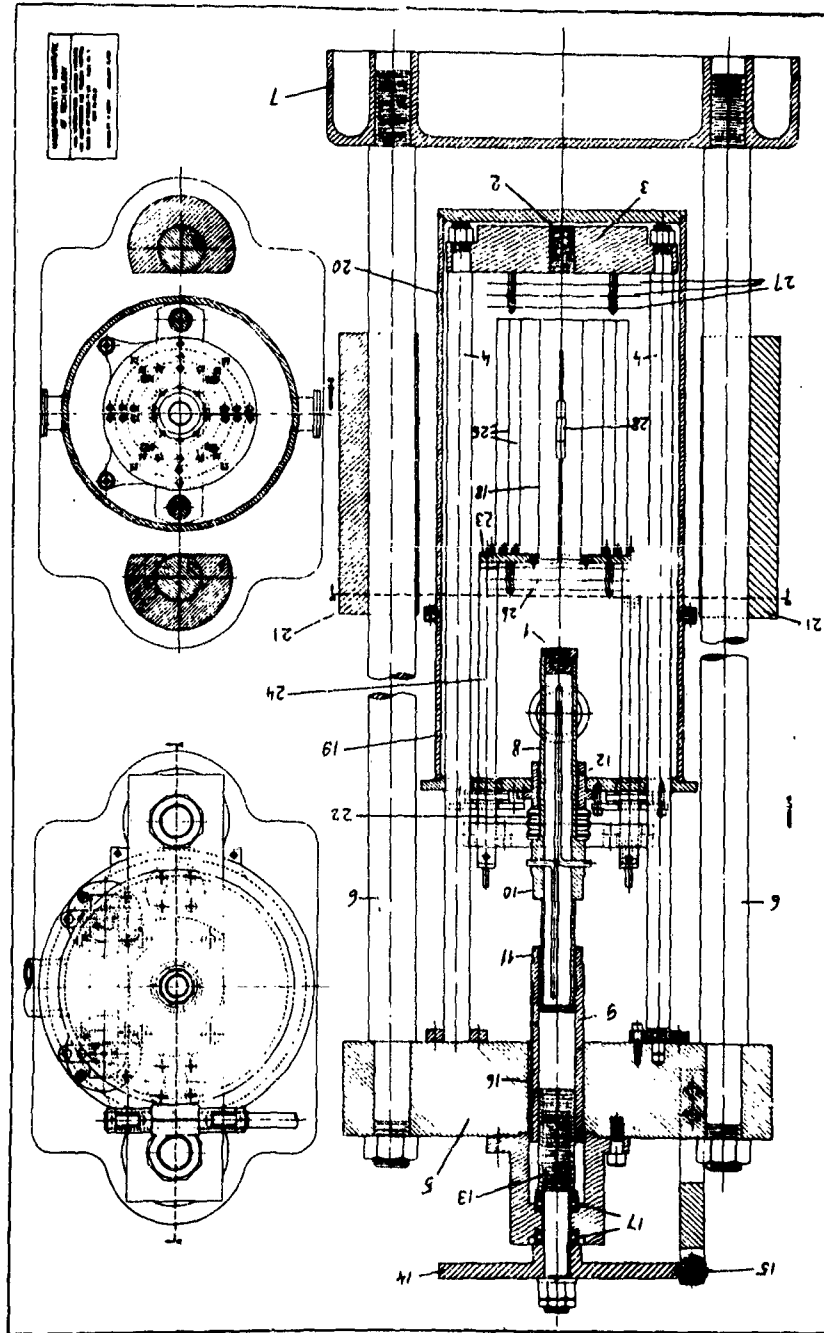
HIGH-TEMPERATURE VACUUM FURNACE FOR USE WITH 5000LB TESTING MACHINE
